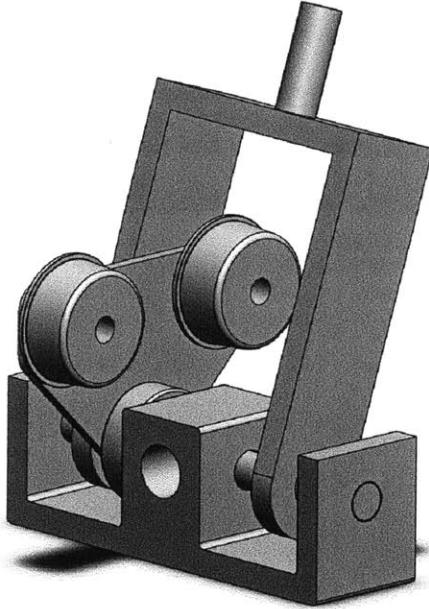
Preliminary custom screw coupling for slider crank design shown with half of the trolley assembly.
